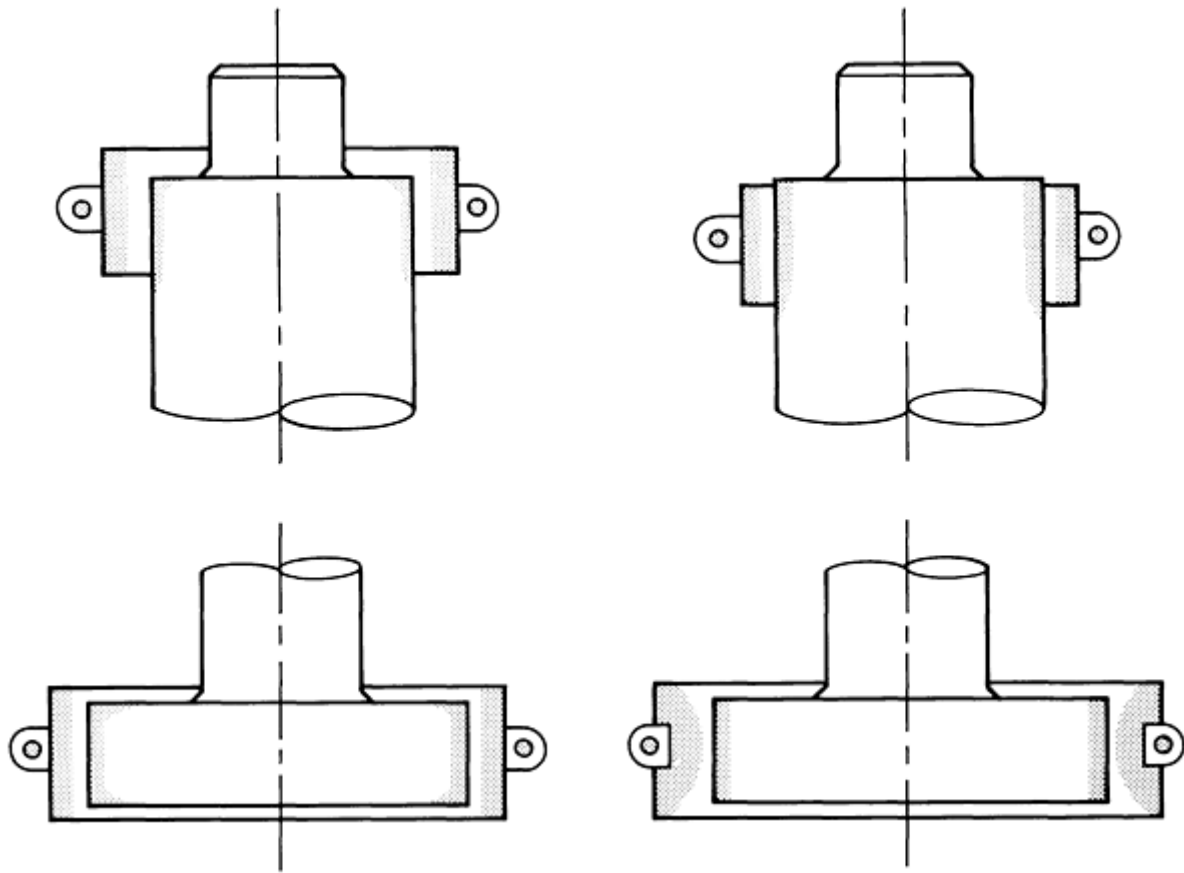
Effect of coil placement on the heating pattern at the end of a workpiece. When the coil overlaps the edge (left), overheating will occur on the end surface. Coil placement should be slightly below the edge (right) for a more uniform heating pattern.
